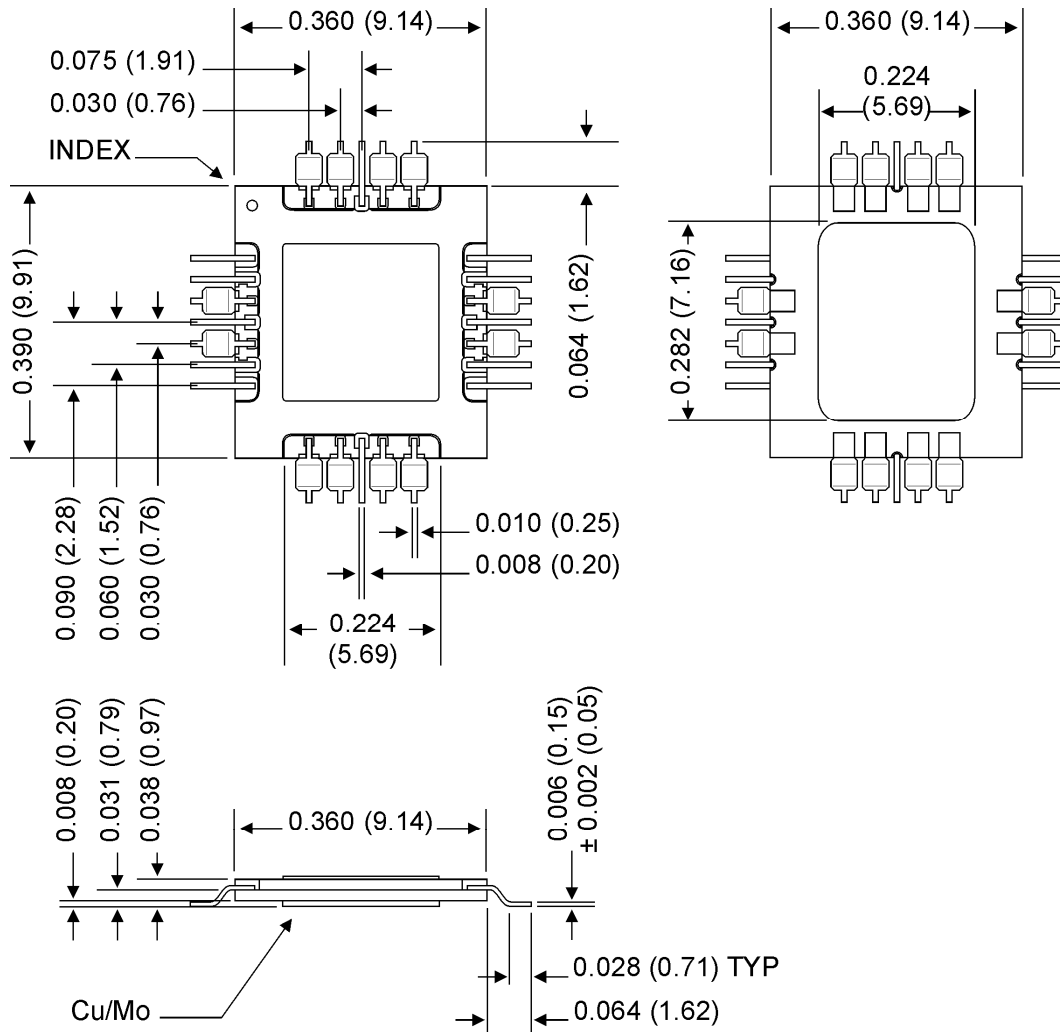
RTH050-HQ package outline, dimensions in inches (mm).
